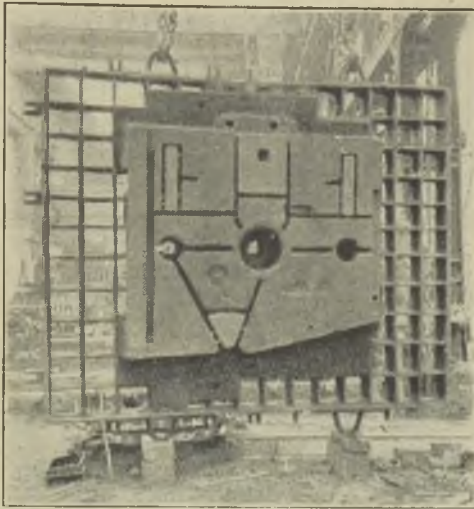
COPE FOR M.P. CYLINDER MOULD.
